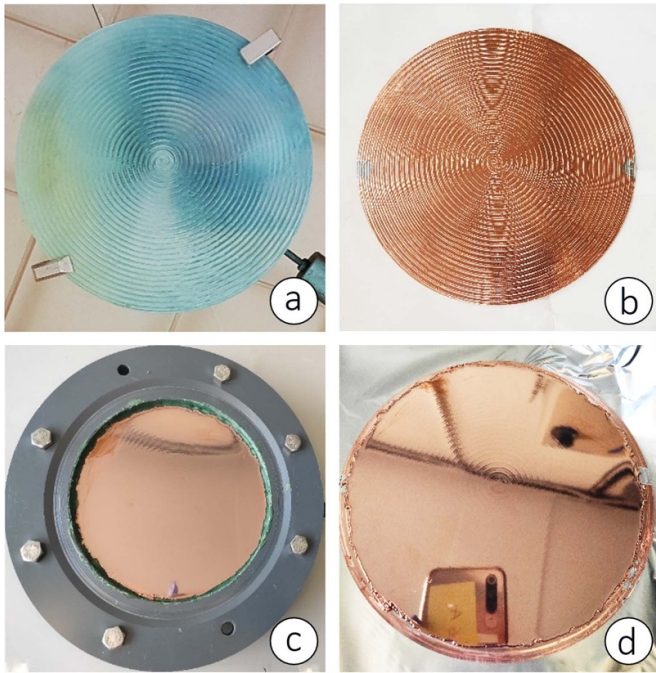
AW-1050 aluminium mandrel mounted inside the coating chamber before the coating of the niobium and copper adhesion films (a), after the coating (b) and after the electroplating of the final copper structure, still mounted on the special support for the electroplating (c) and without the support (d).
